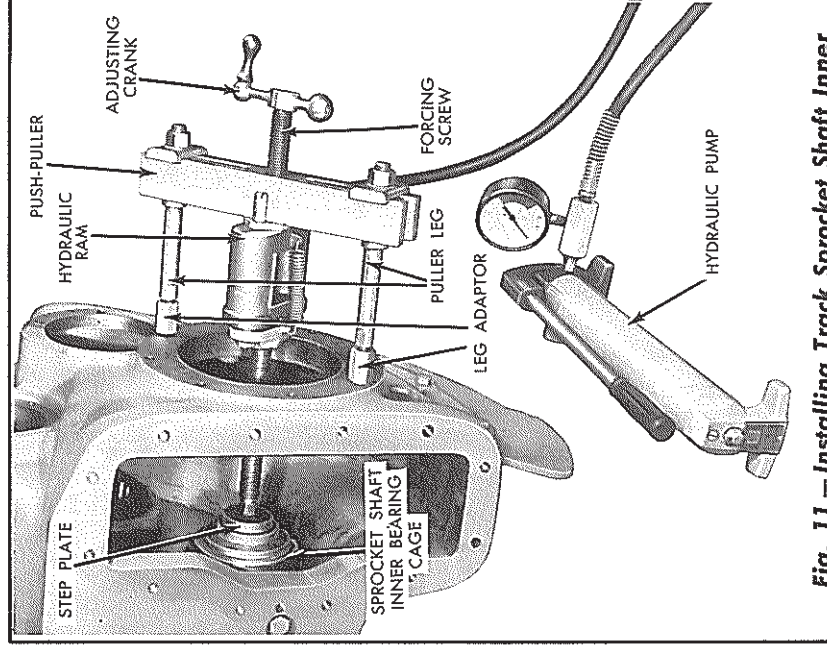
Installing Track Sprocket Shaft Inner Bearing Cage and Cover
